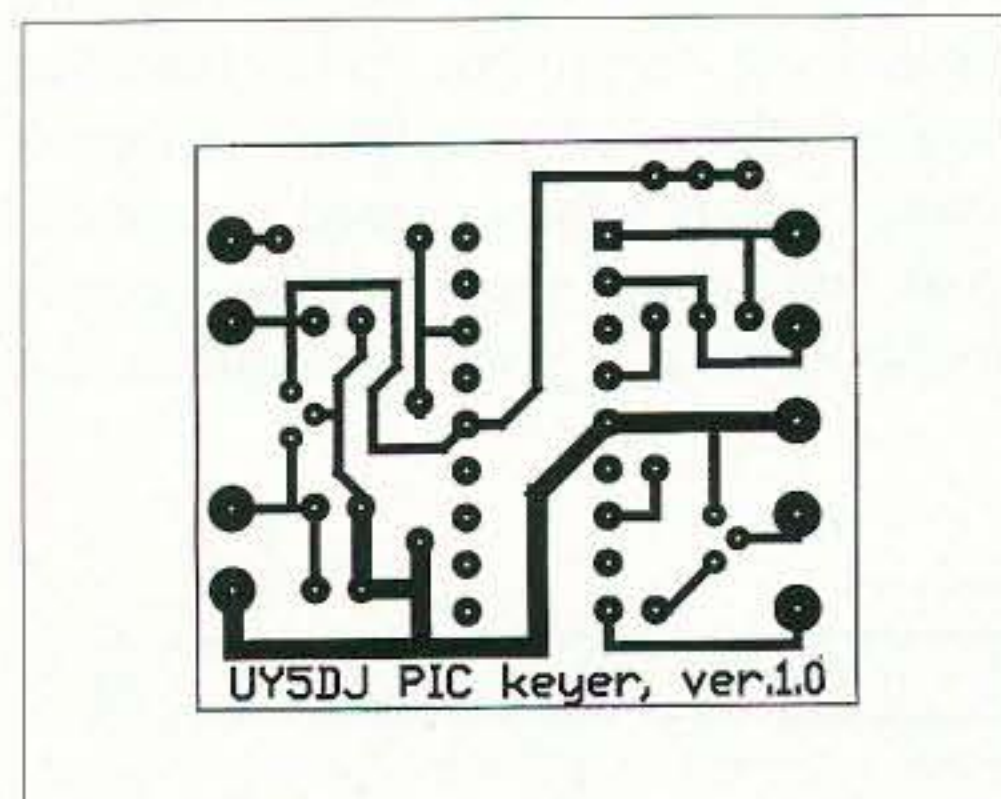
(b). PIC keyer printed circuit board, soldering side.
